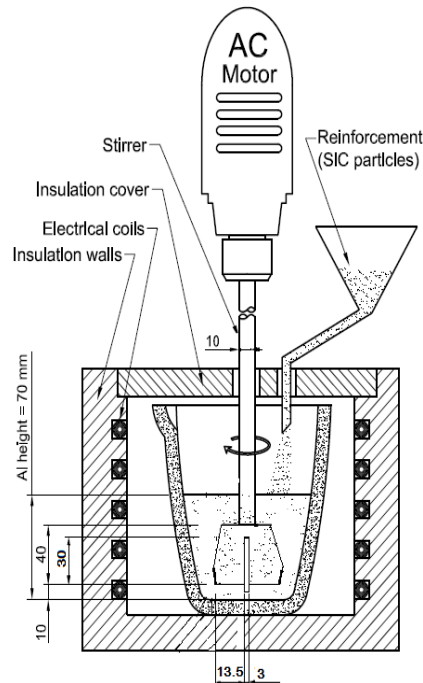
the dimensions of crucible and stirrer used in Al-SiC composites
